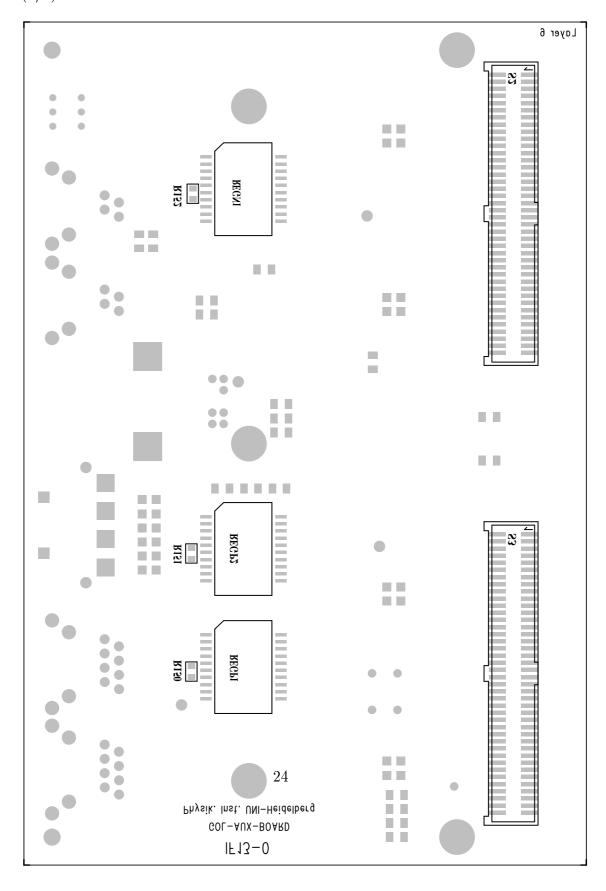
GOL-auxiliary board component placement specification bottom (2/2)
